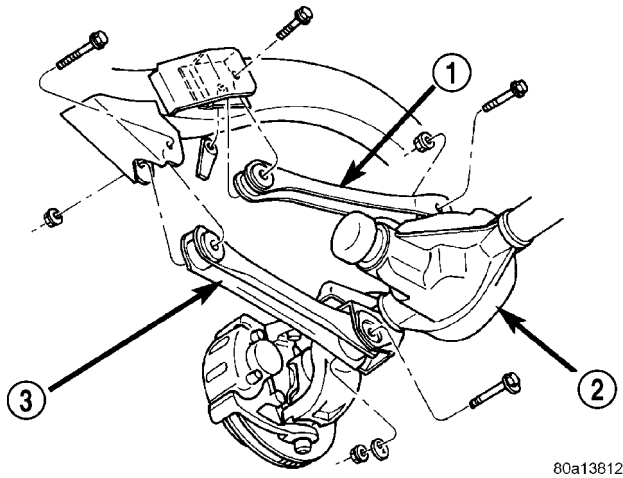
UPPER & LOWER SUSPENSION ARMS
